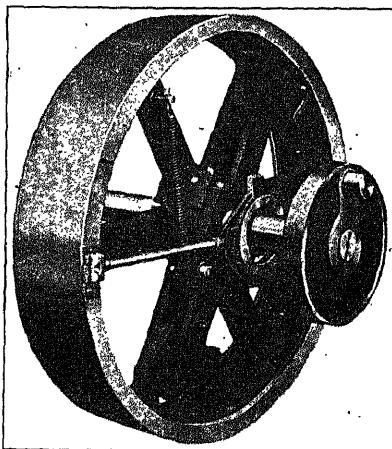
Flywheel governor with swinging eccentric. The Brownell Co., Dayton, Ohio.
